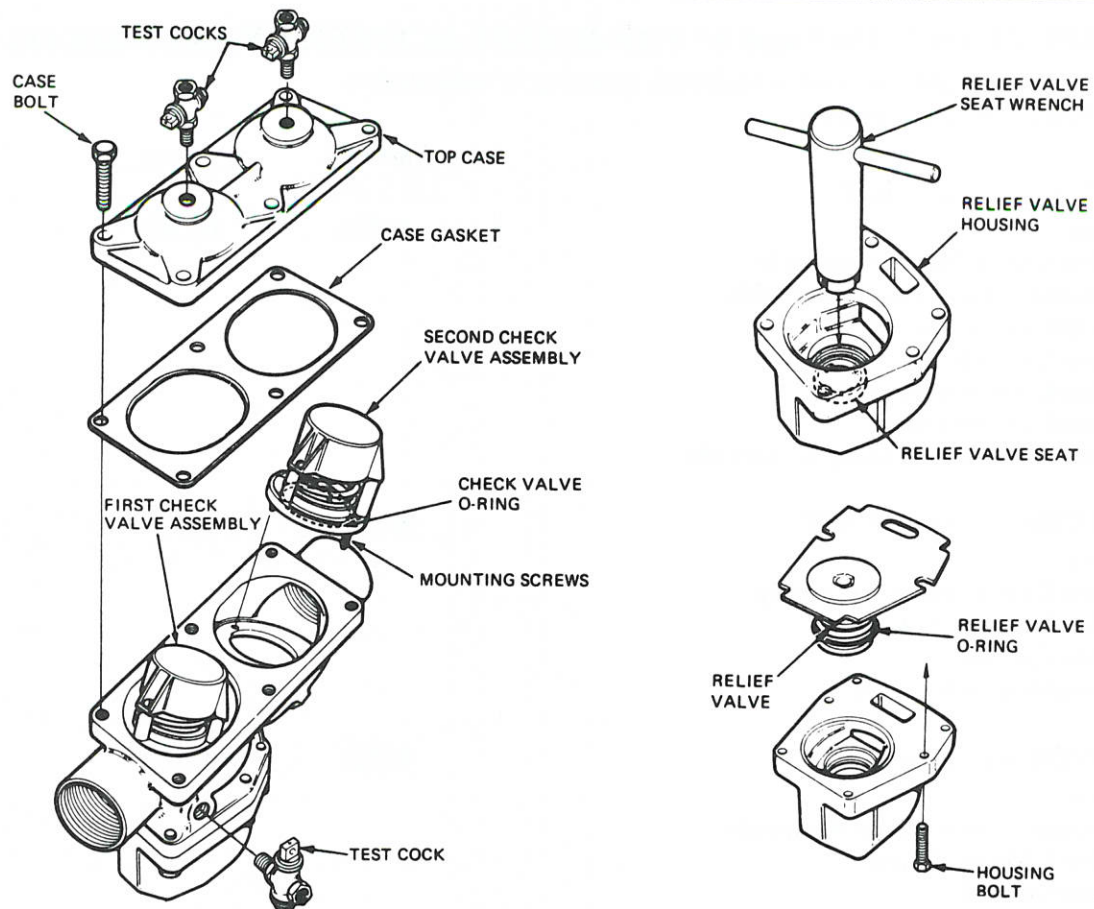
A. 3/4"-1" FRP-I REPLACEMENT PARTS
